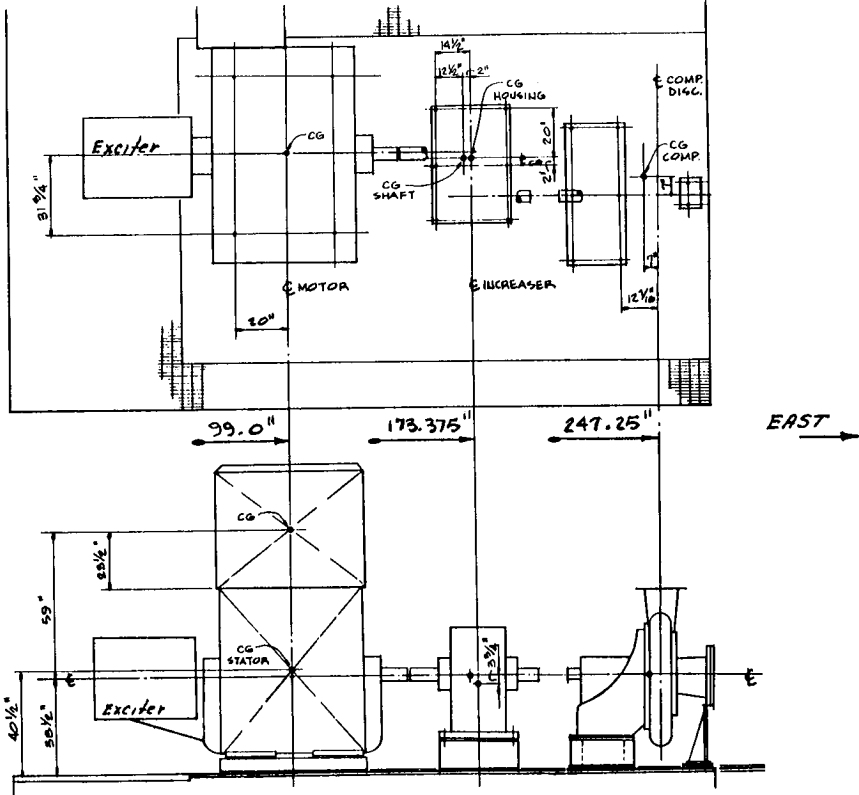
Basic Layout of the Motor, Increaser, Compressor and Shafting
